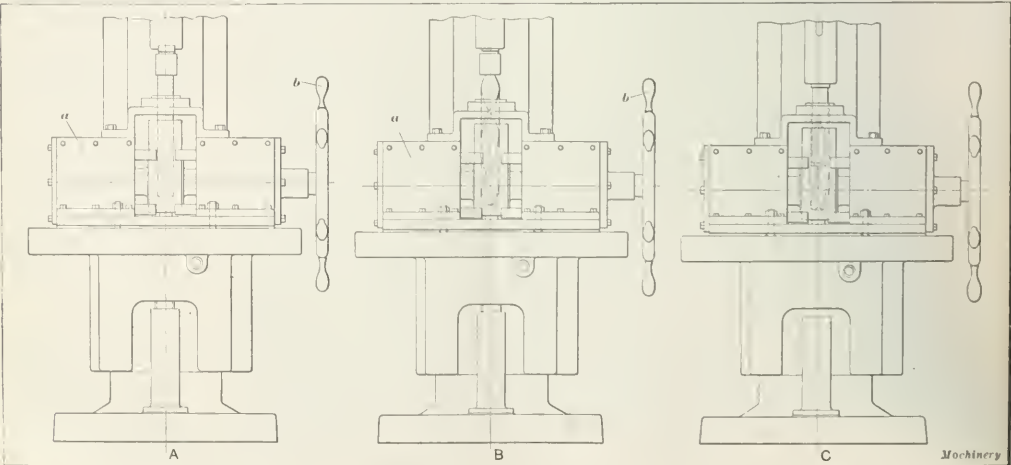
Preliminary Operations in roughing out a British High-explosive Shell on a High-power Drilling Machine
